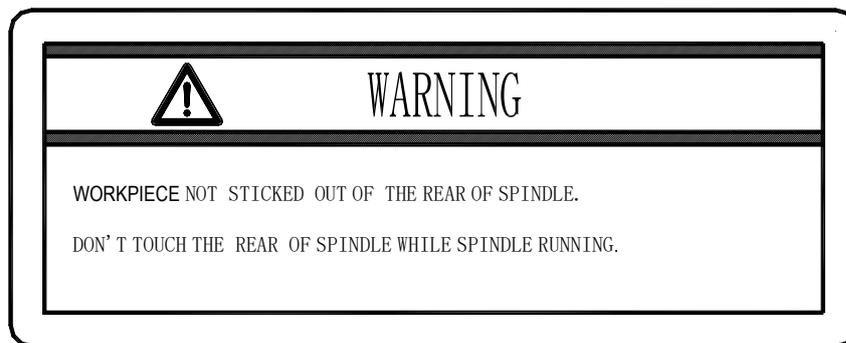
Label for workpiece not stuck out of the rear of spindle
